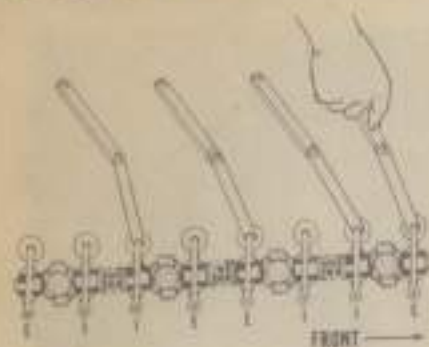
All non-diesel models. With number 1 piston at TDC on compression stroke, valve clearances (tappet gap) can be set on the four valves indicated. Refer to text for recommended clearances. Refer to Fig. 32A and adjust remainder of valves.
